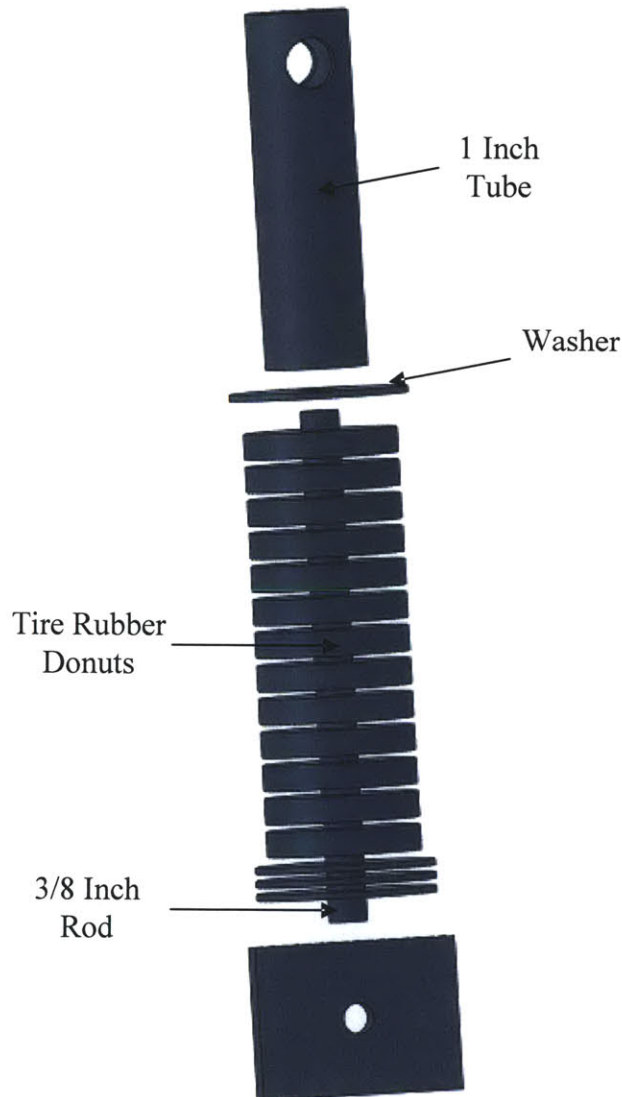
Exploded View of Spring and Spring Mount. This mount will change very little in between the experimental prototype and suspension systems built in Guwahati. The welding and minor drilling are completely within reach of the limited tooling available at The Rickshaw Bank's factory.
